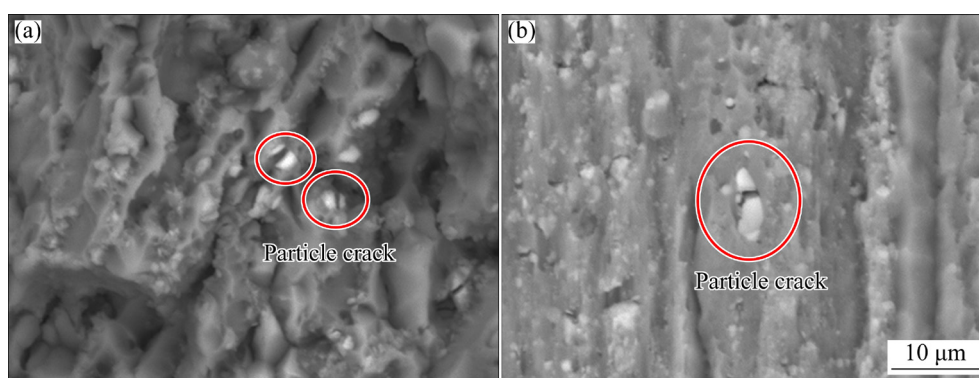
SEM BSE images showing fractographs of notched specimen ($R=10$ mm) (a) and shear specimen (b) (The red circles highlight the particle crack on the fractographs)
